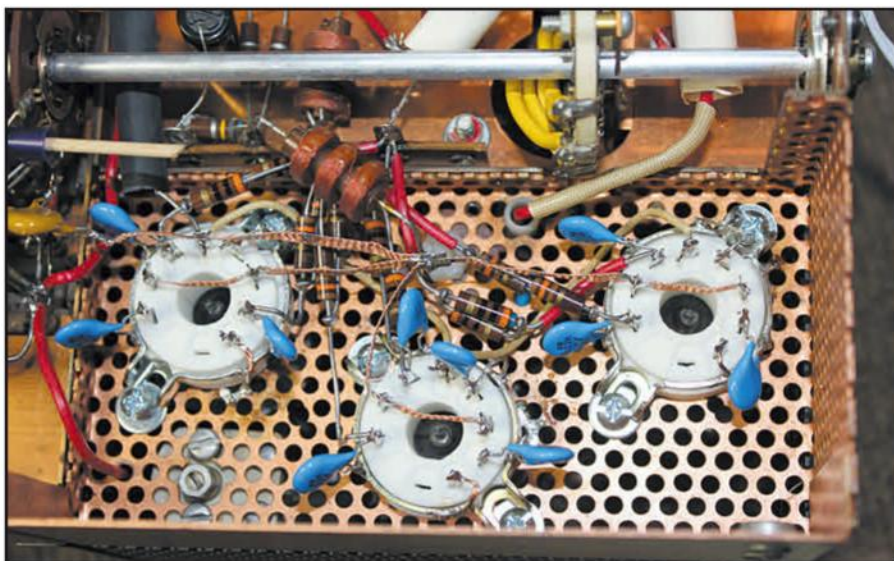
Photo H. The power amplifier was rebuilt with new tube sockets and an improved wiring layout.
